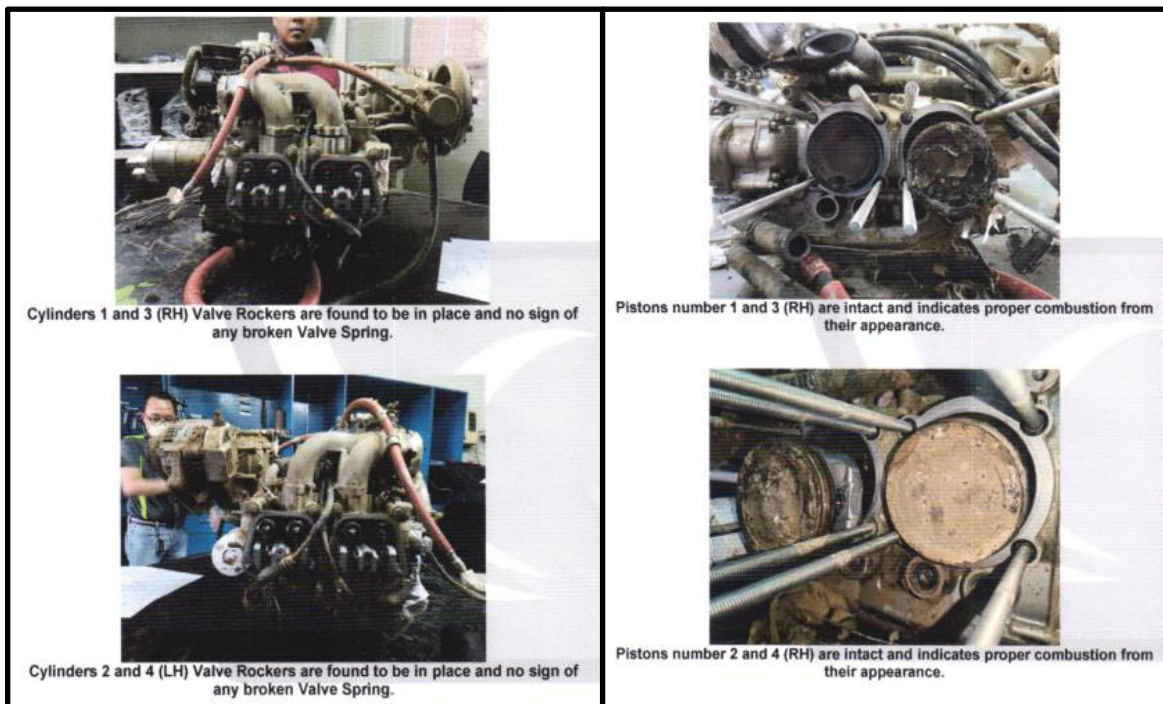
Engine cylinders and pistons during the top overhaul inspection
